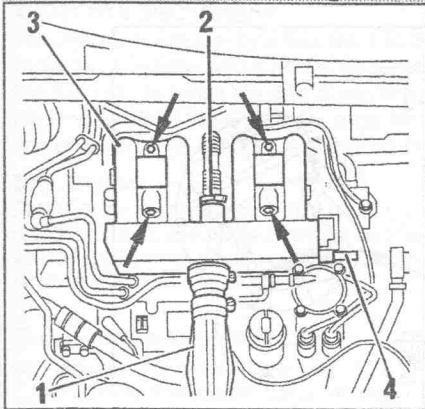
The parts shown must be removed (refer to text). The arrows show where the air inlet manifold is secured.
